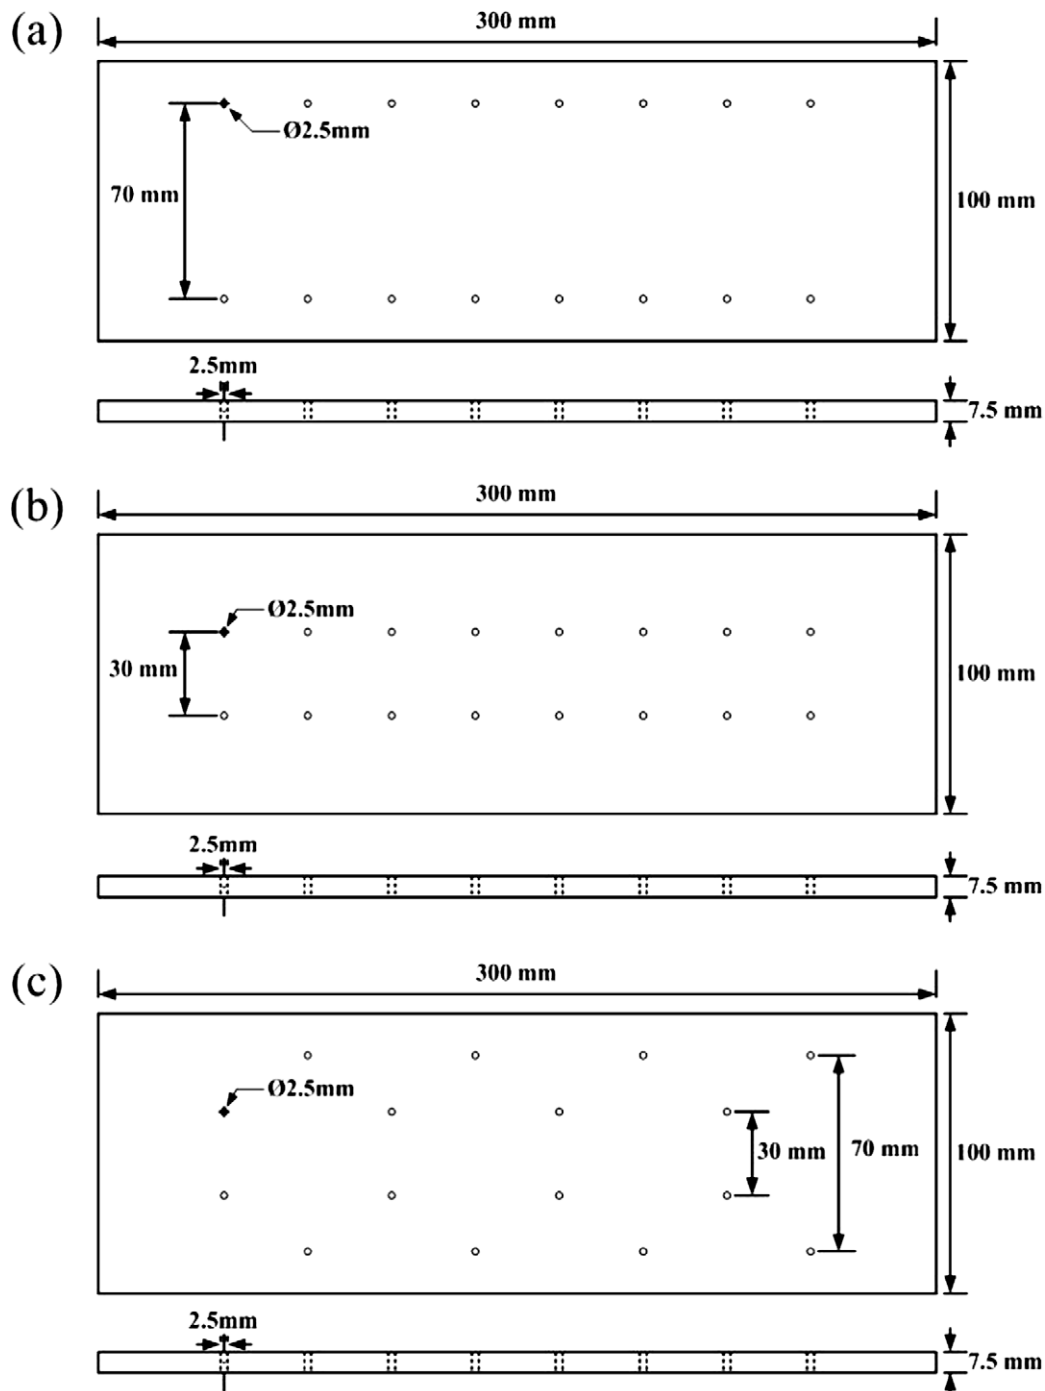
The arrangement of the film holes: (a) side-type; (b) middle-type; and (c) staggered-type.
